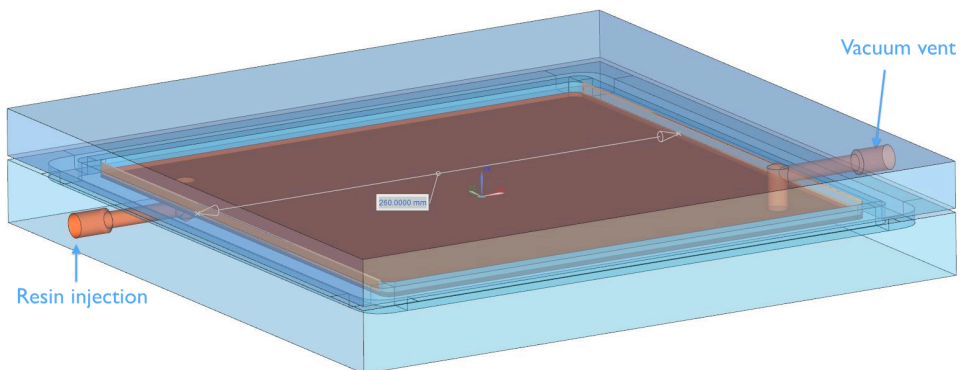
3D model of the mould cavity with sprue (resin injection) and vent. The gates have to enter the tool from the sides because of the constraints from the platen press.
